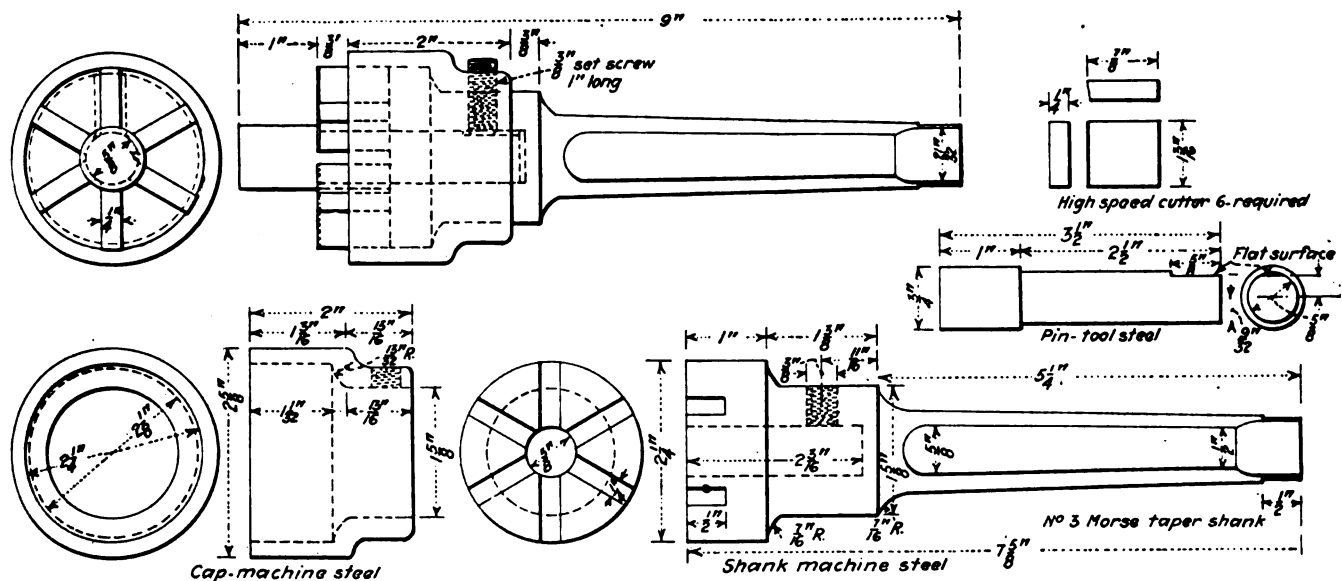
SCARFING TOOLS FOR FLUE-SHEET FLANGES
